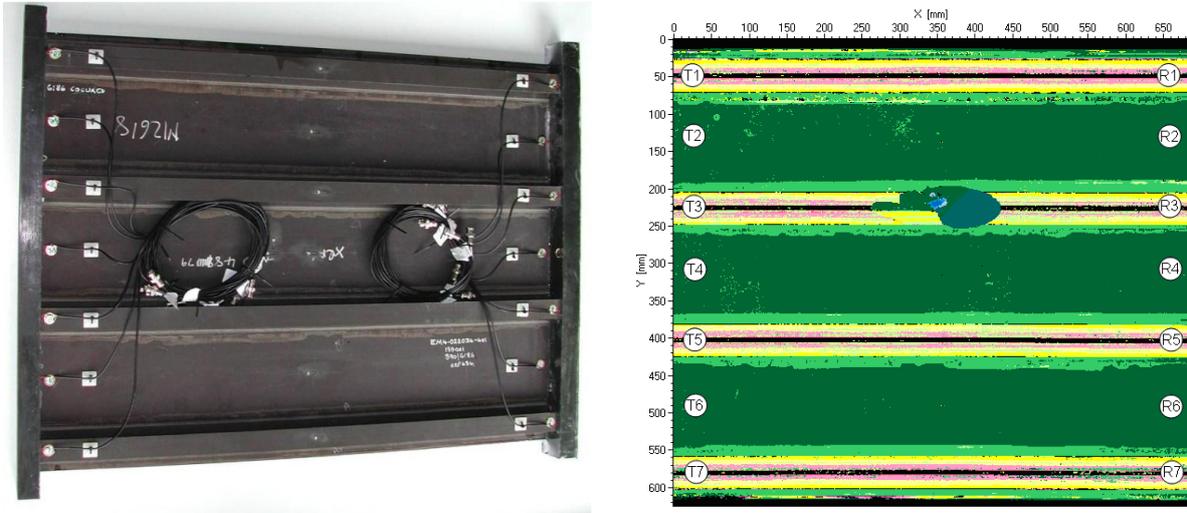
Stringer stiffened CFRP-panel 22, left hand side: photo, showing also the clamping at the edges, right hand side: ultrasonic D-scan with drawn-in positions of the piezo patches
